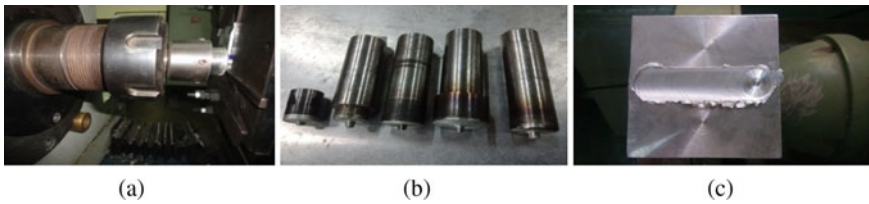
a Friction stir welding spindle. b Friction stir welding tool. c Material welded plate
